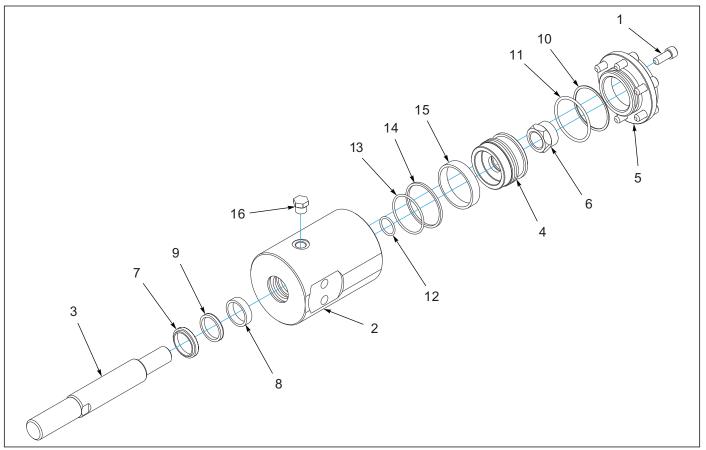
Cylinder Assembly 2-1/2 x 2-1/2
